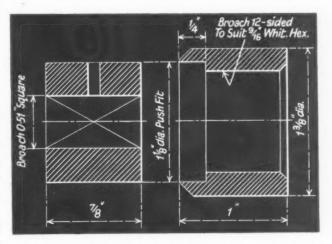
By Making the Wrench in Two Parts as Shown and Copper-brazing the Parts together after Final Machining, the Square and Twelve-sided Socket Holes Can be Produced by a Broaching Operation
